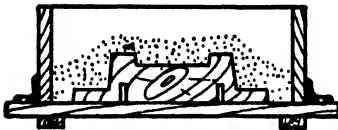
Filling the Draw (Hollow Cylinder Casting).
